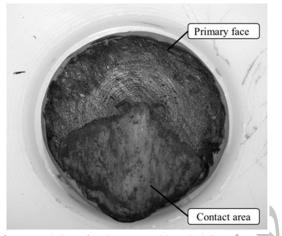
Wax workpiece after the contact with conical die شکل 8 قطعه خمیری بعد از تماس با قالب مخروطی
